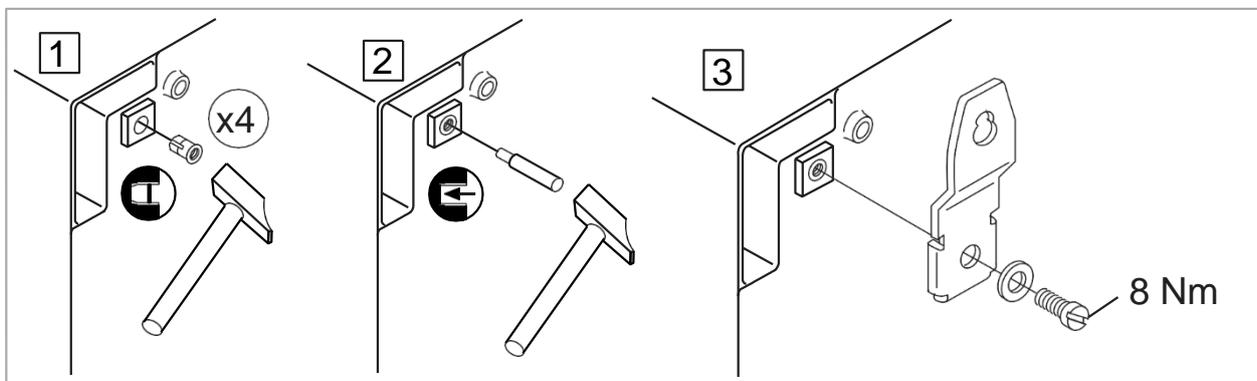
Wall mounting device cabinet with delivered mounting brackets
